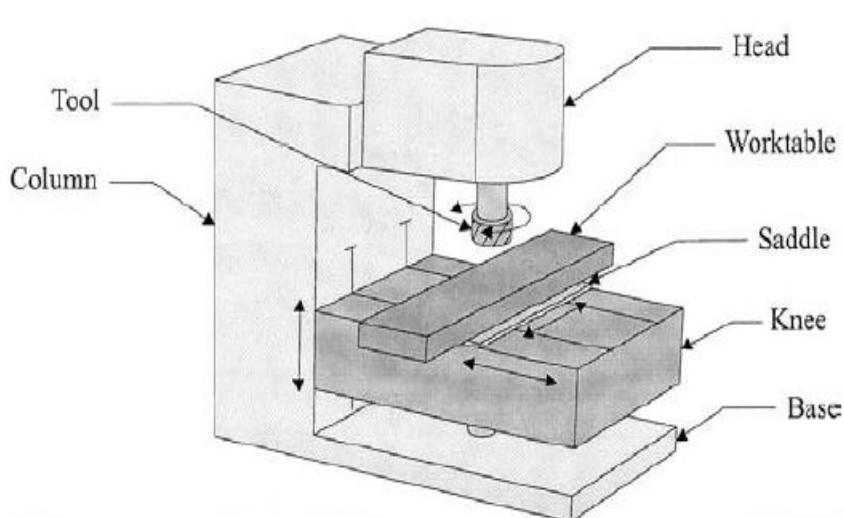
Principal components of a turret-type knee-and-column milling machine
